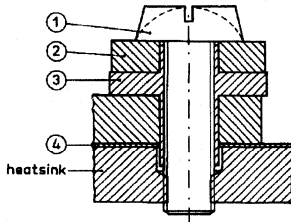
Insulated screw mounting with rectangular washer into tapped heatsink.
